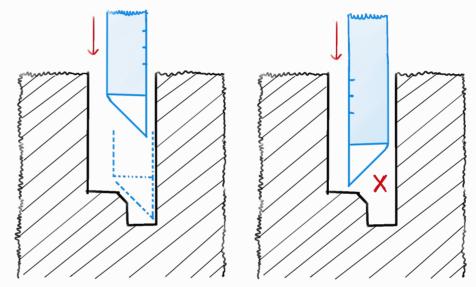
Side view of asymmetrical filter-slot design shows how filter can enter the machine in only a single orientation.
